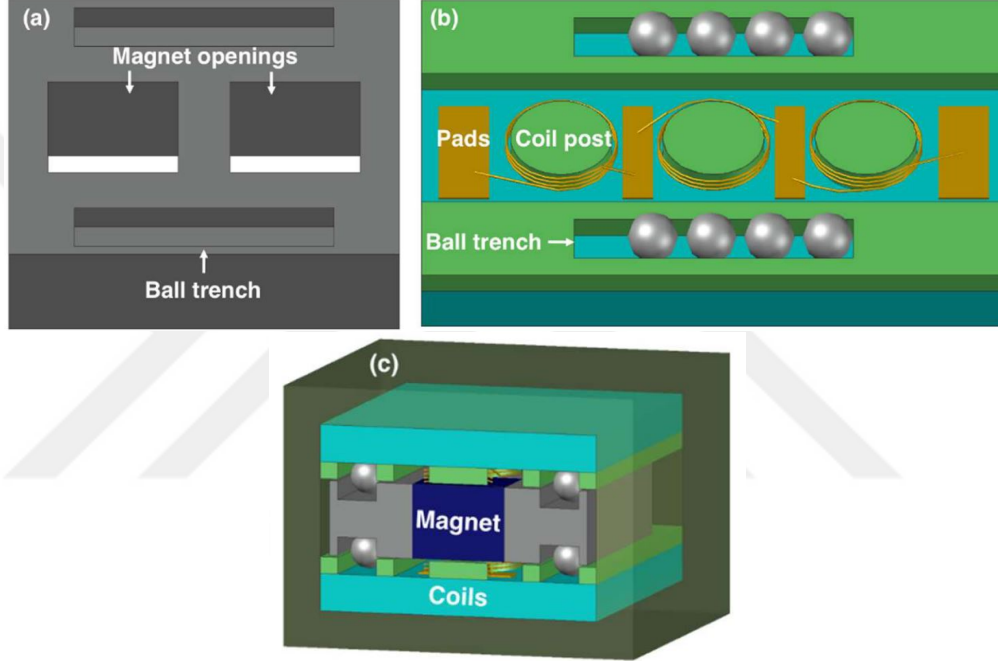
(a) Platform final design shown with openings without magnets, (b) a view of the final stator design with cylindrical coil posts, and (c) a cross-sectional view of full device with a package.
